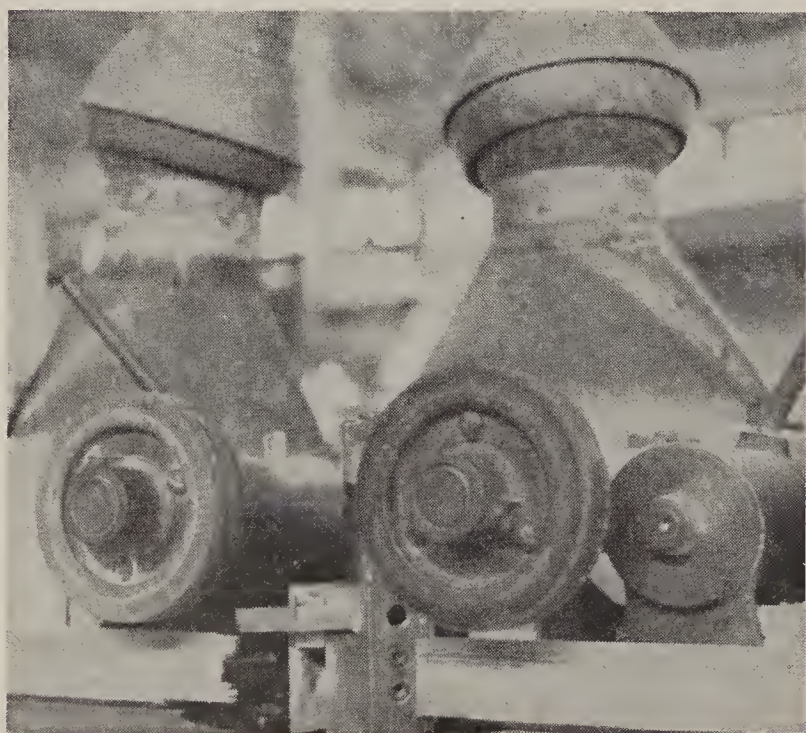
Vertical cutter head used to cut a spline groove in a panel edge member.
